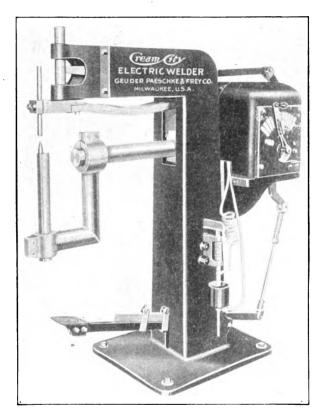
Spot Welder Showing Simple Construction Courtesy of Geuder, Paeschke, and Frey Company
